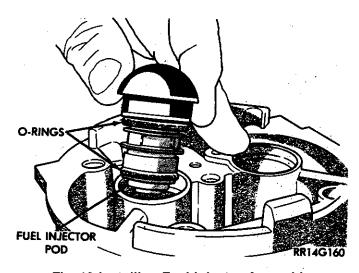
Installing Fuel Injector Assembly ing hole. Driver's side locating pin is 4 mm in diameter (Fig. 9).
